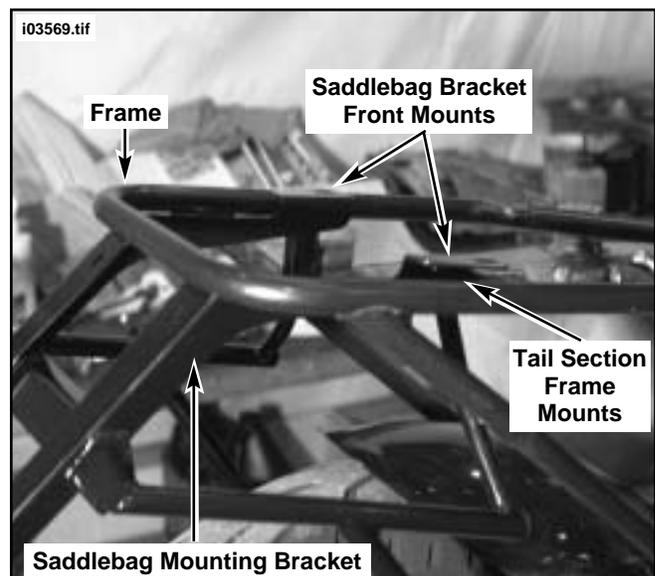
Position Front Upper Portion of Saddlebag Mounting Bracket
